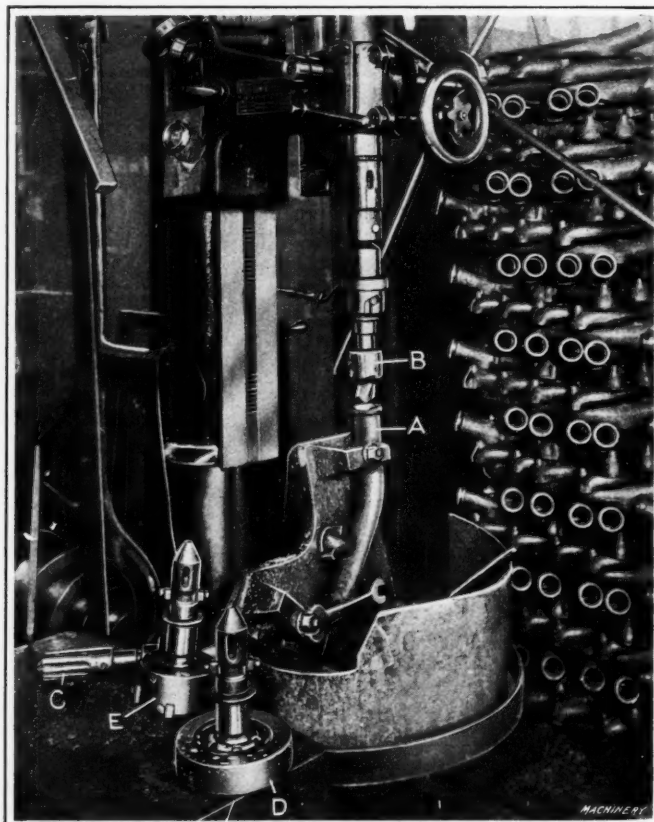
"Aurora" 28-inch Upright Drill equipped with "Wizard" Quick-change Chuck and Tools for drilling, countersinking, hollow-milling and threading End of Exhaust Manifolds
